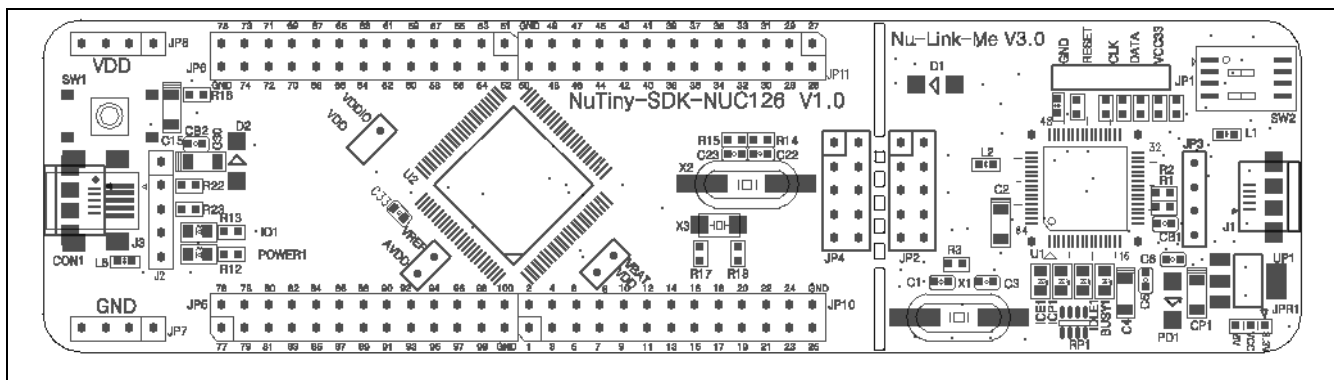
NuTiny-SDK-NUC126 PCB Placement
